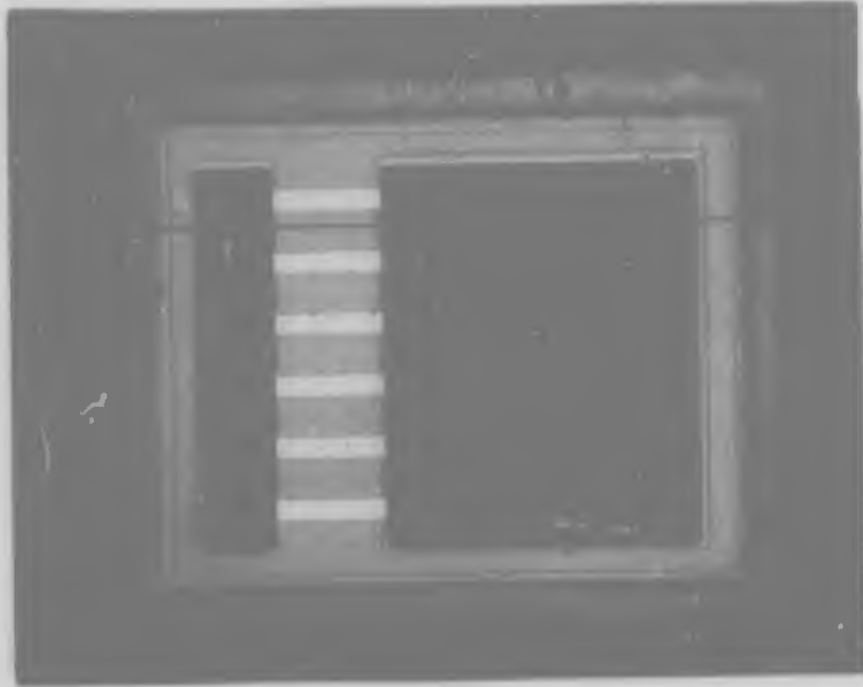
GEOMETRY A, PLAN VIEW - COMPLETED BUMPED DIE (140X)
